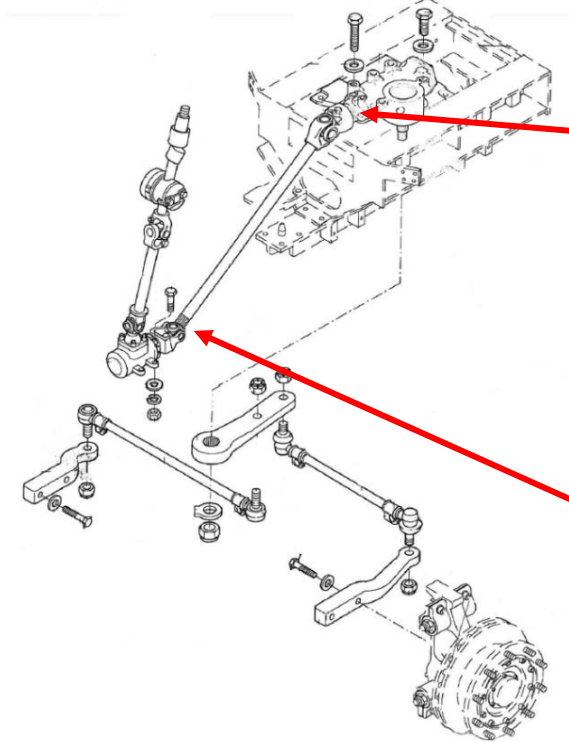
The steering system from the wheel axle, via the steering worm, to the fixture of the wheel rim. Source: Neoplan
